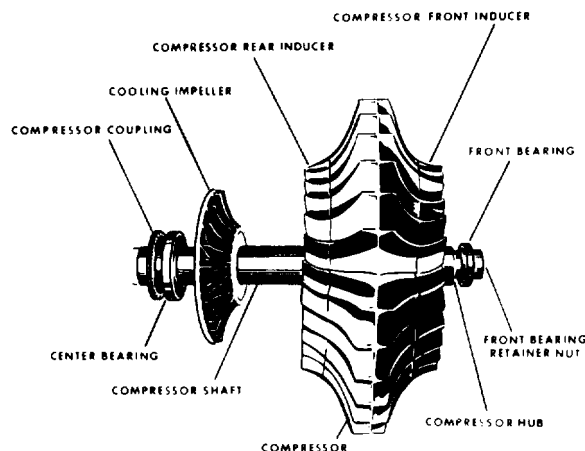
Impeller with inducer vanes as separate pieces.
